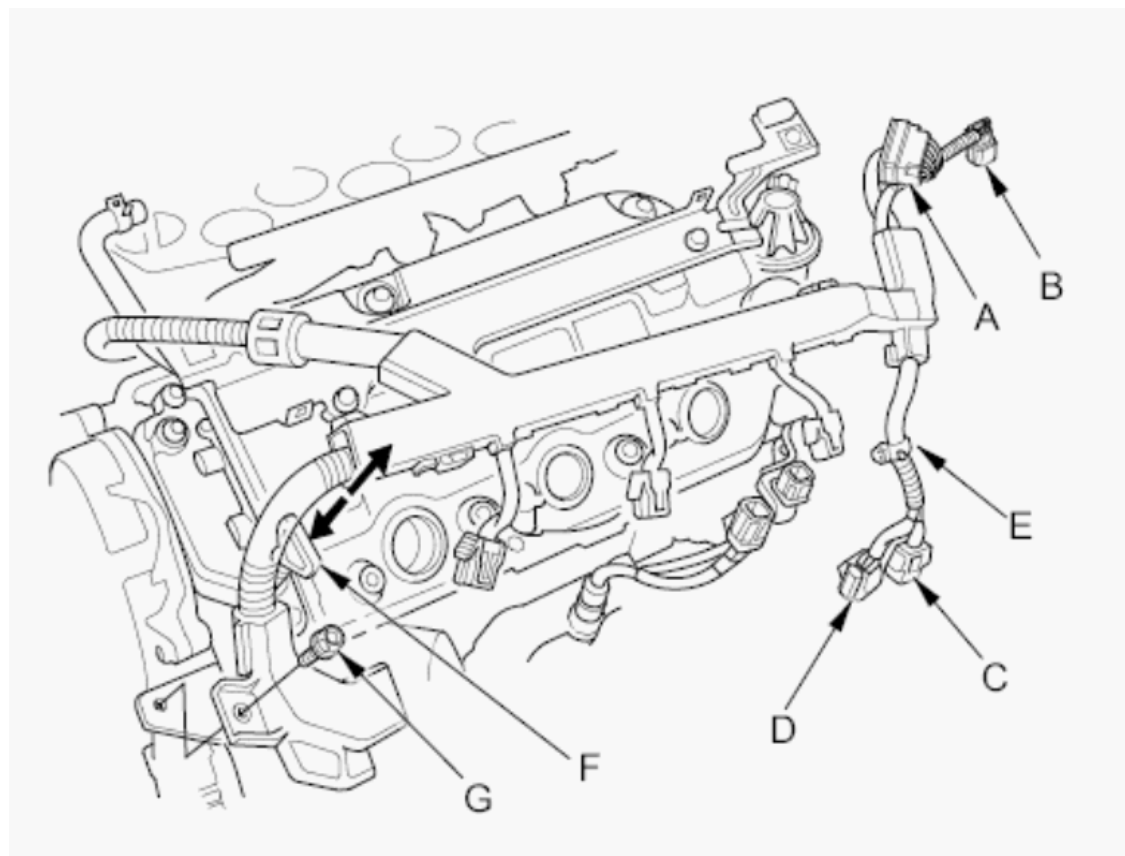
Identifying Ignition Coils Connectors, Harness Clamp And Harness Holders
